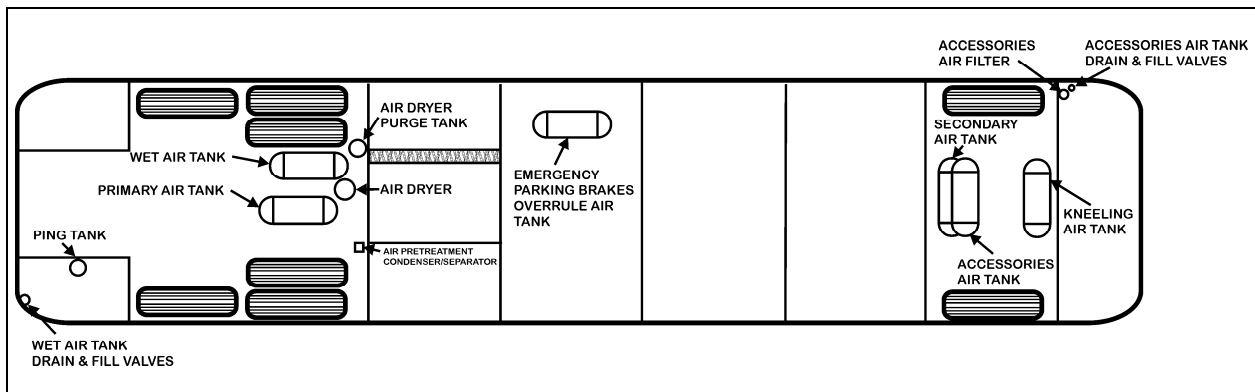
I-BEAM FRONT SUSPENSION AIR TANKS LOCATION
